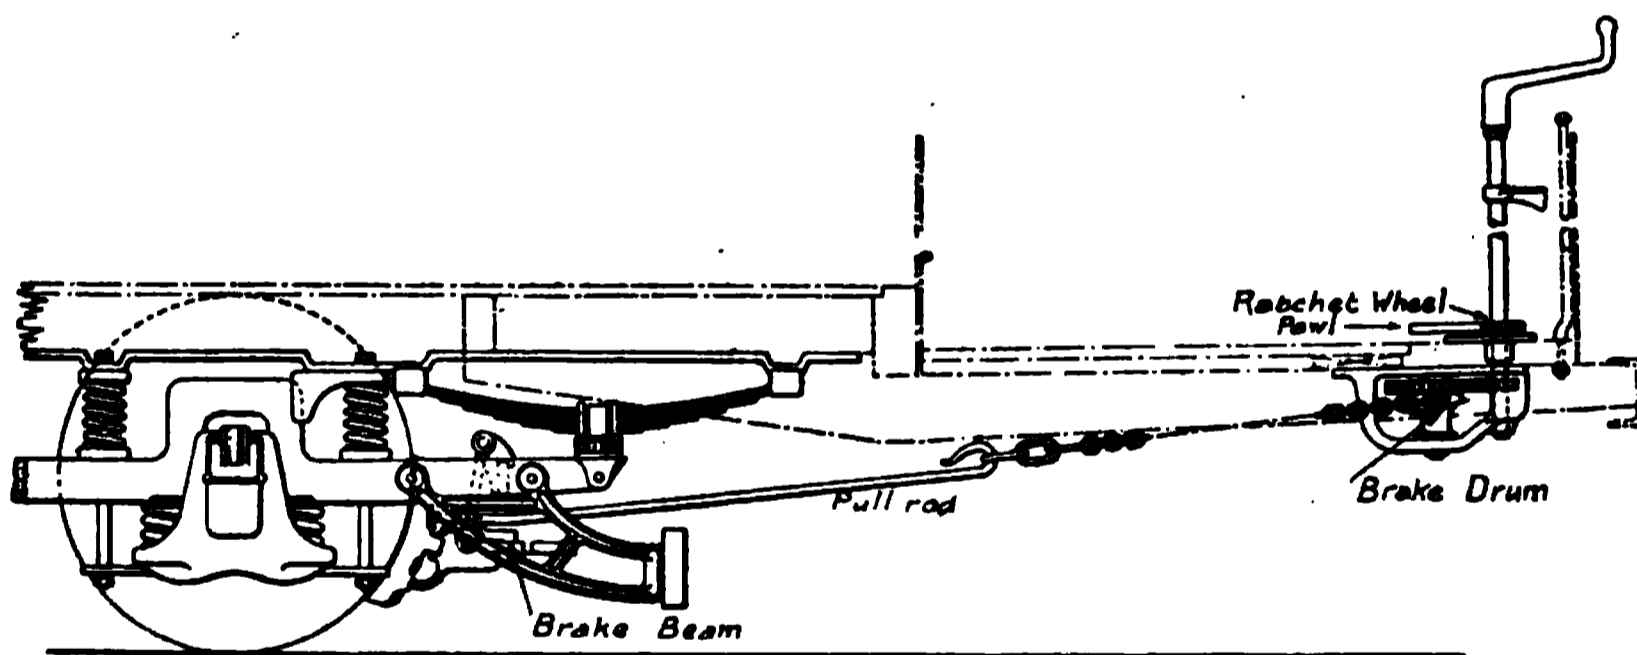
Arrangement of Platform Gear for Wheel Brake on Single-truck Car.
